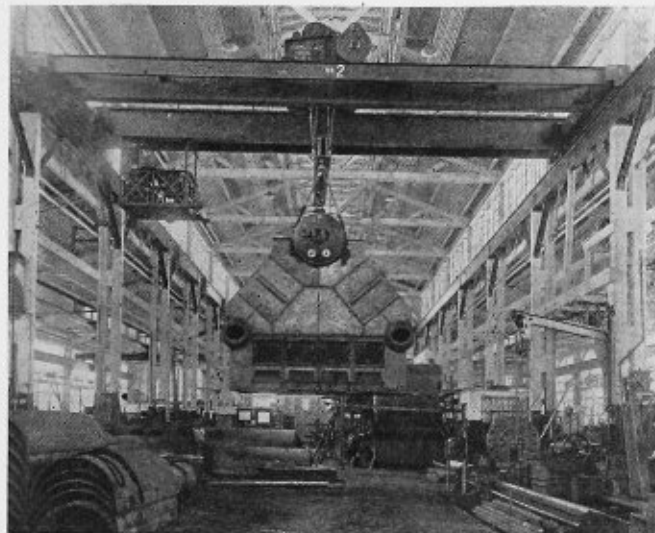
Transferring Boiler Complete from Assembly Department to Testing Department on 25-Ton Chesapeake Crane
